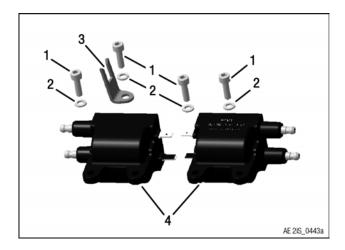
Double ignition coils (uncommon - old, plugged connection)
